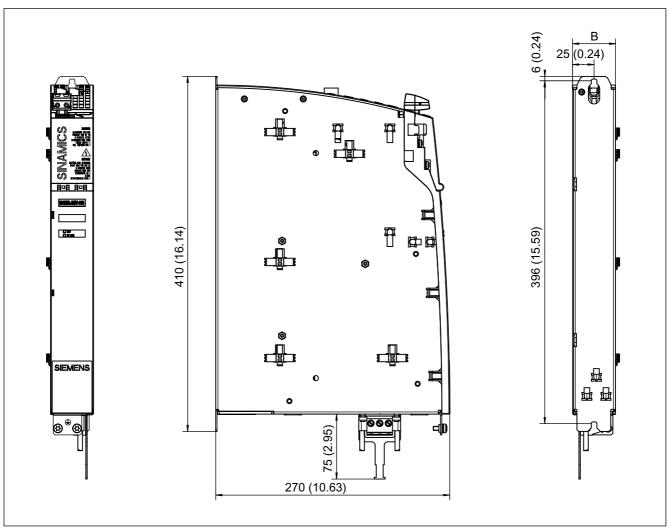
Dimension drawing of the 5 kW and 10 kW Smart Line Modules with internal air cooling
